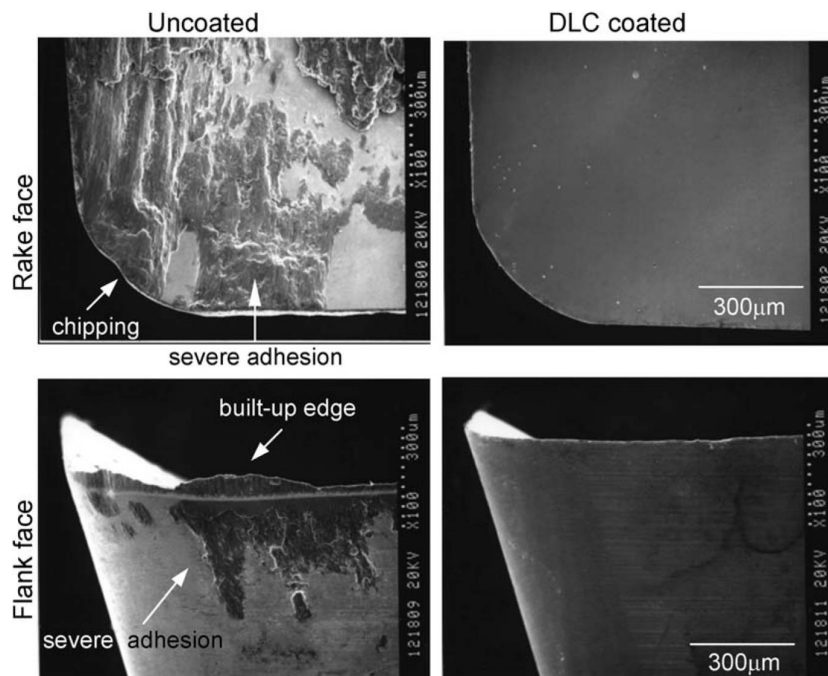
SEM micrographs of the rake and the flank faces of the tool after the dry milling test for the AlCu2.5Si18 alloy (cutting length 36 m) [47].
